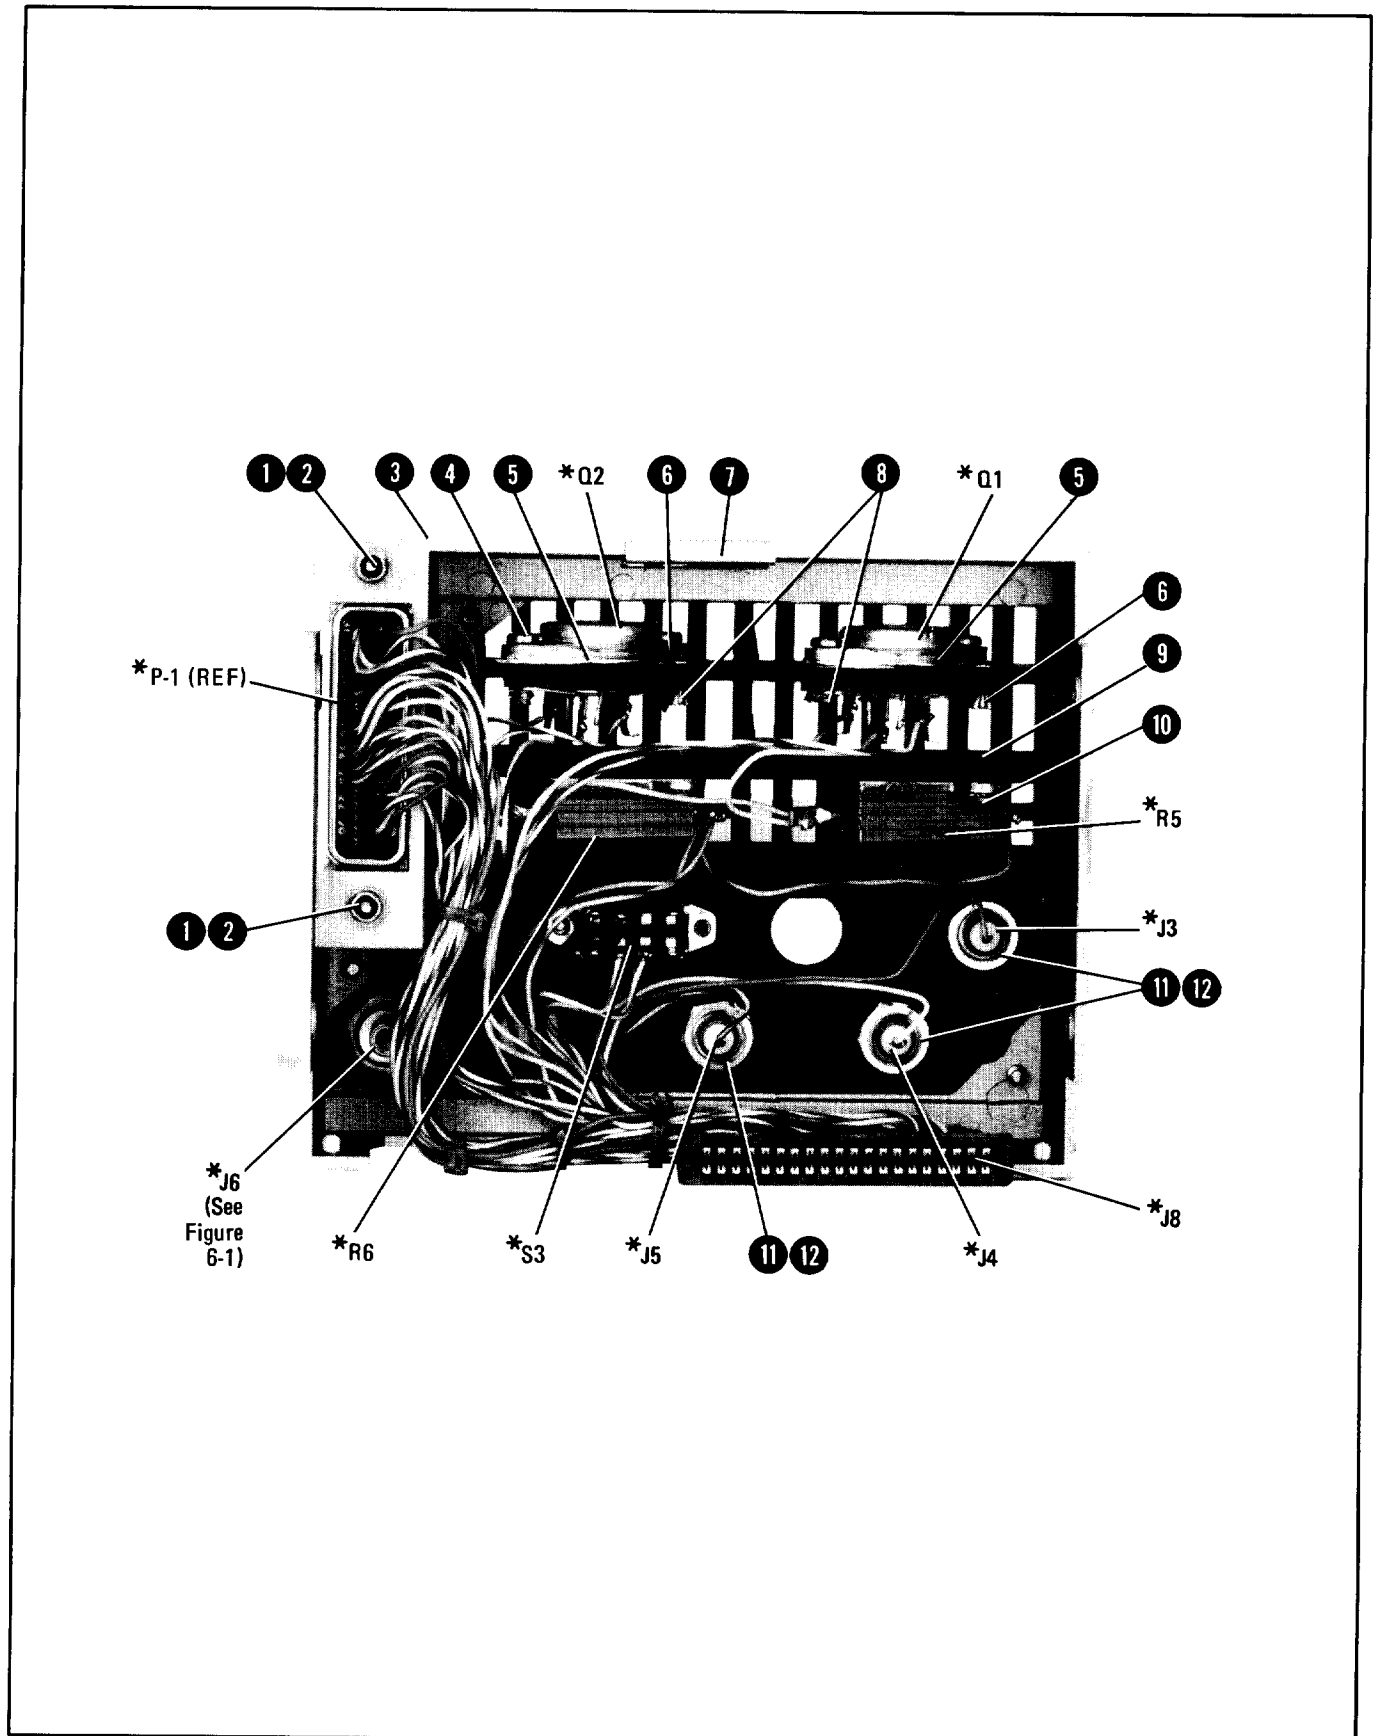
Rear Panel Parts Identification (CHANGE F)
